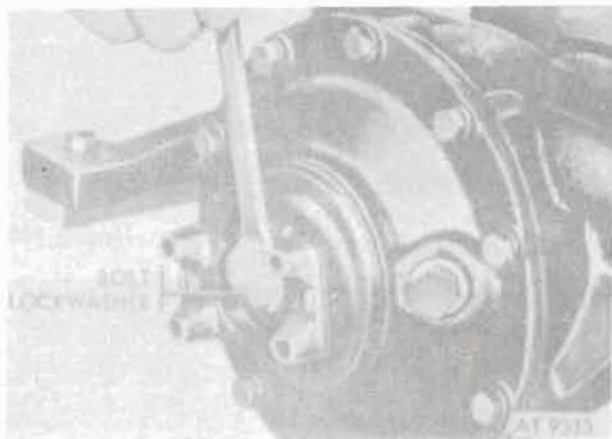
Side gear drive flange retaining bolt and lockwasher.
